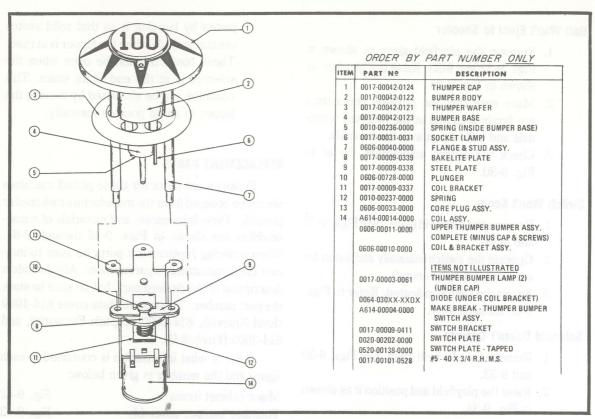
Exploded view and parts list of the thumper bumper and coil assembly.
